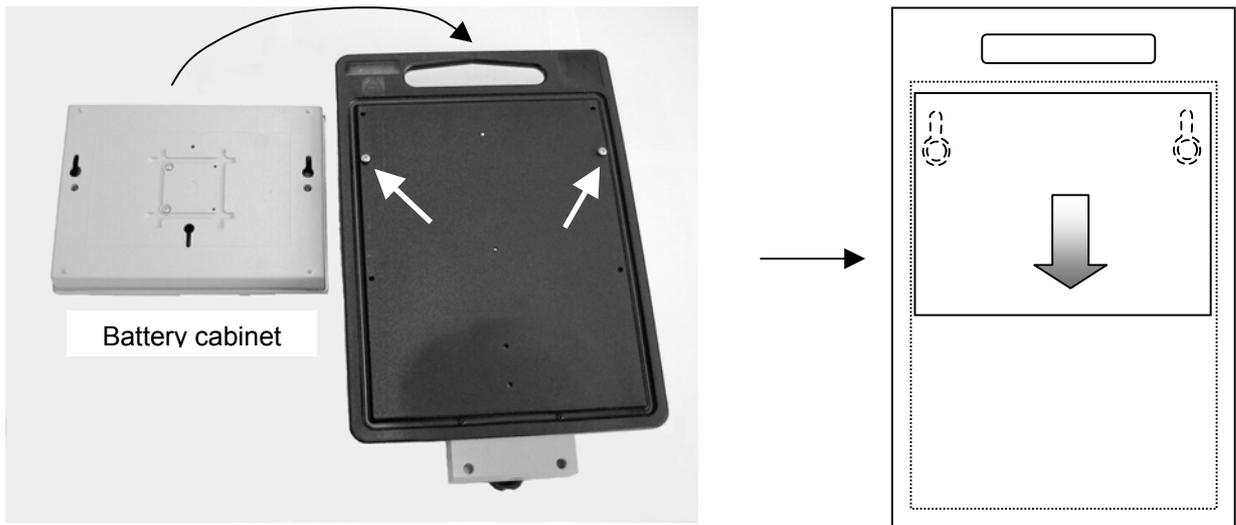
Mounting a Battery Cabinet on the Plastic Board.
